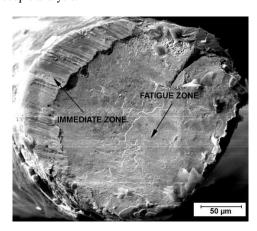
Microscopic image of fatigue fracture of the cracked wire coming from tire No. 1, shown in Fig. 1. Visible smooth fatigue zone and the immediate zone.
